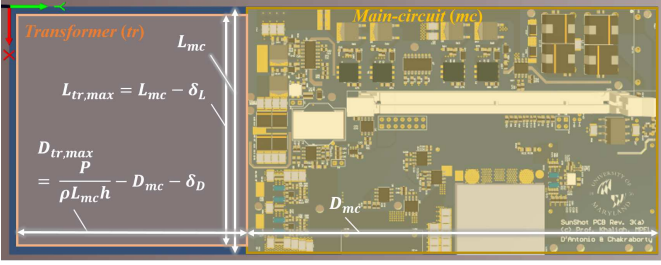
Illustration of the transformer dimensional constraints in light of the main-circuit layout. Assuming the rest of the power circuit PCB has been pre-designed, the transformer length should not exceed the PCB length, while the maximum depth is decided according to the power density target and PCB height. Terms δ_D and δ_L denote additional margins on the allowable dimension.
